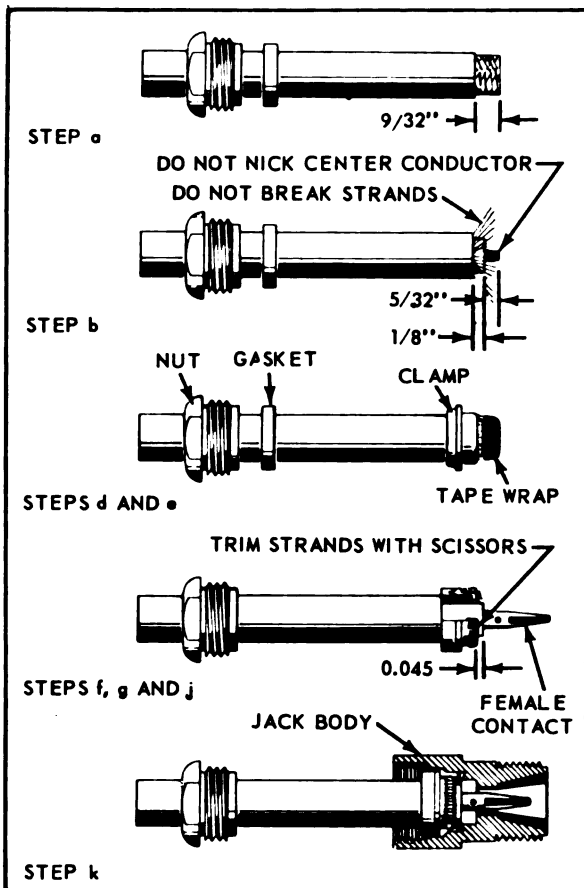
Attaching Improved N Connectors to Coaxial Cable.
